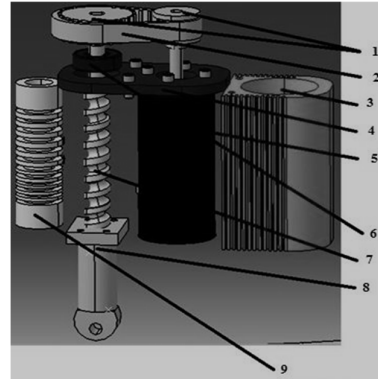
Drive system: 1 - Gear, 2 - Timing belt, 3 - Heat sink, 4 - Clamping plate, 5 - Motor, 6 - Radial bearing, 7 - Ball screw, 8 - ball nut, 9 - Accordion type protection.
